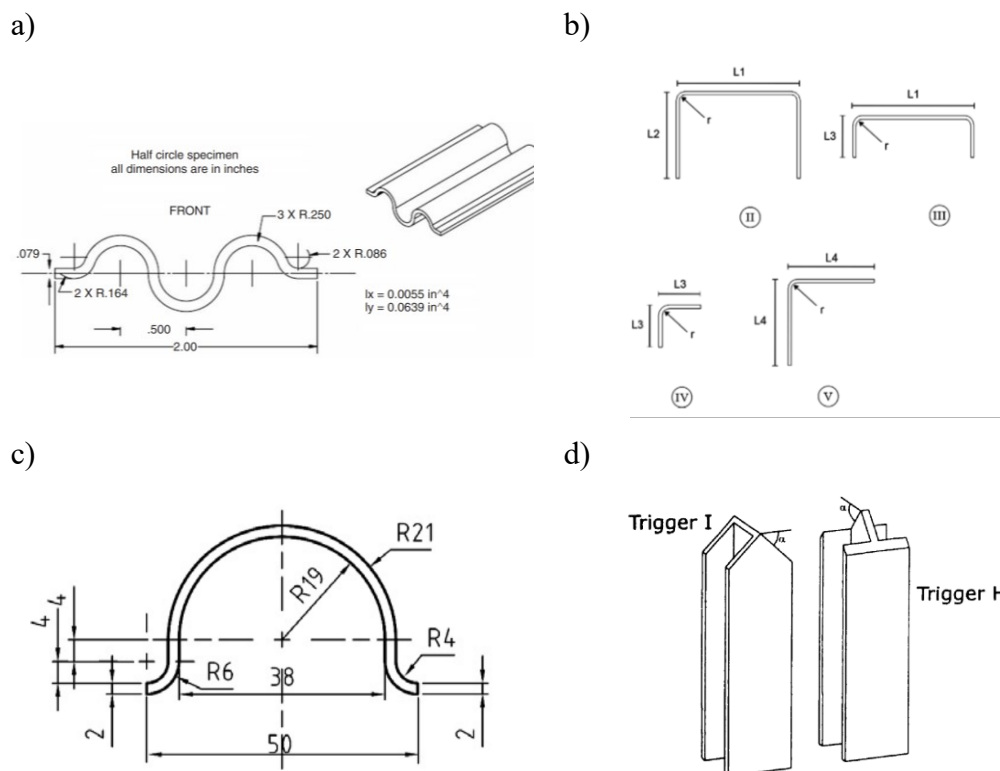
a) Sinusoidal specimen proposed by Feraboli [52]; b) Angular and C-shaped cross sections [19]; c) Omega section [53]; d) I-section specimens [39].
